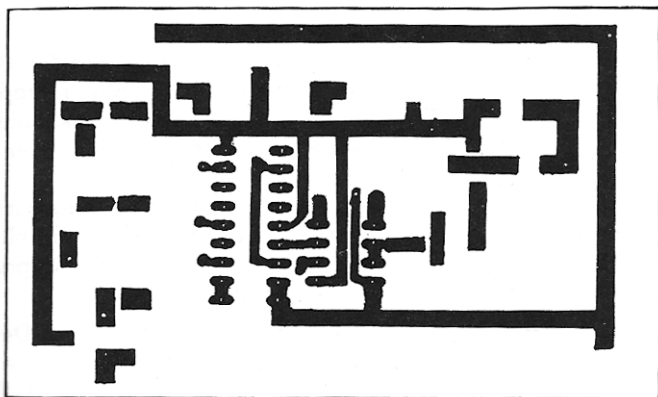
PCB layout for the circuit shown in Fig. 2.
